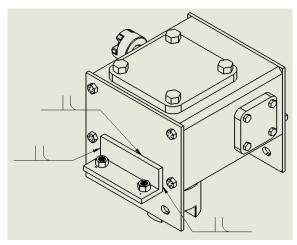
Gear Reducer Side Mount Subassembly Weld Locations
